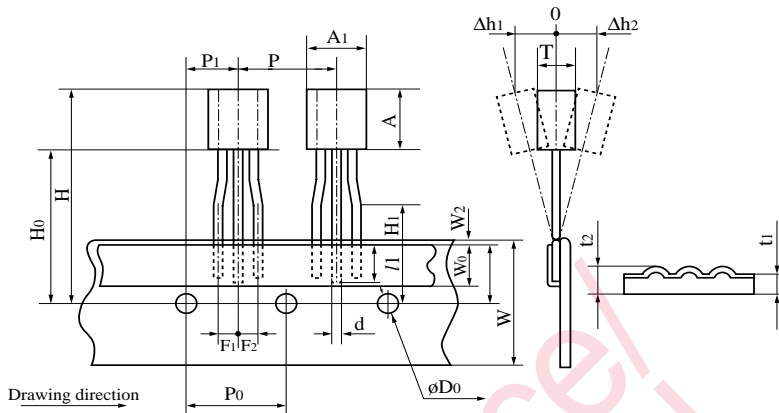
TO-92 Type Package Taping-Dimensions (Ammunition pack)
